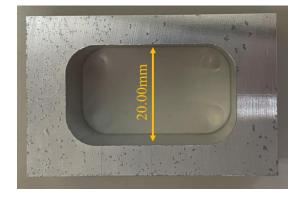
Through pocket machined with modification and width of center of the pocket.
